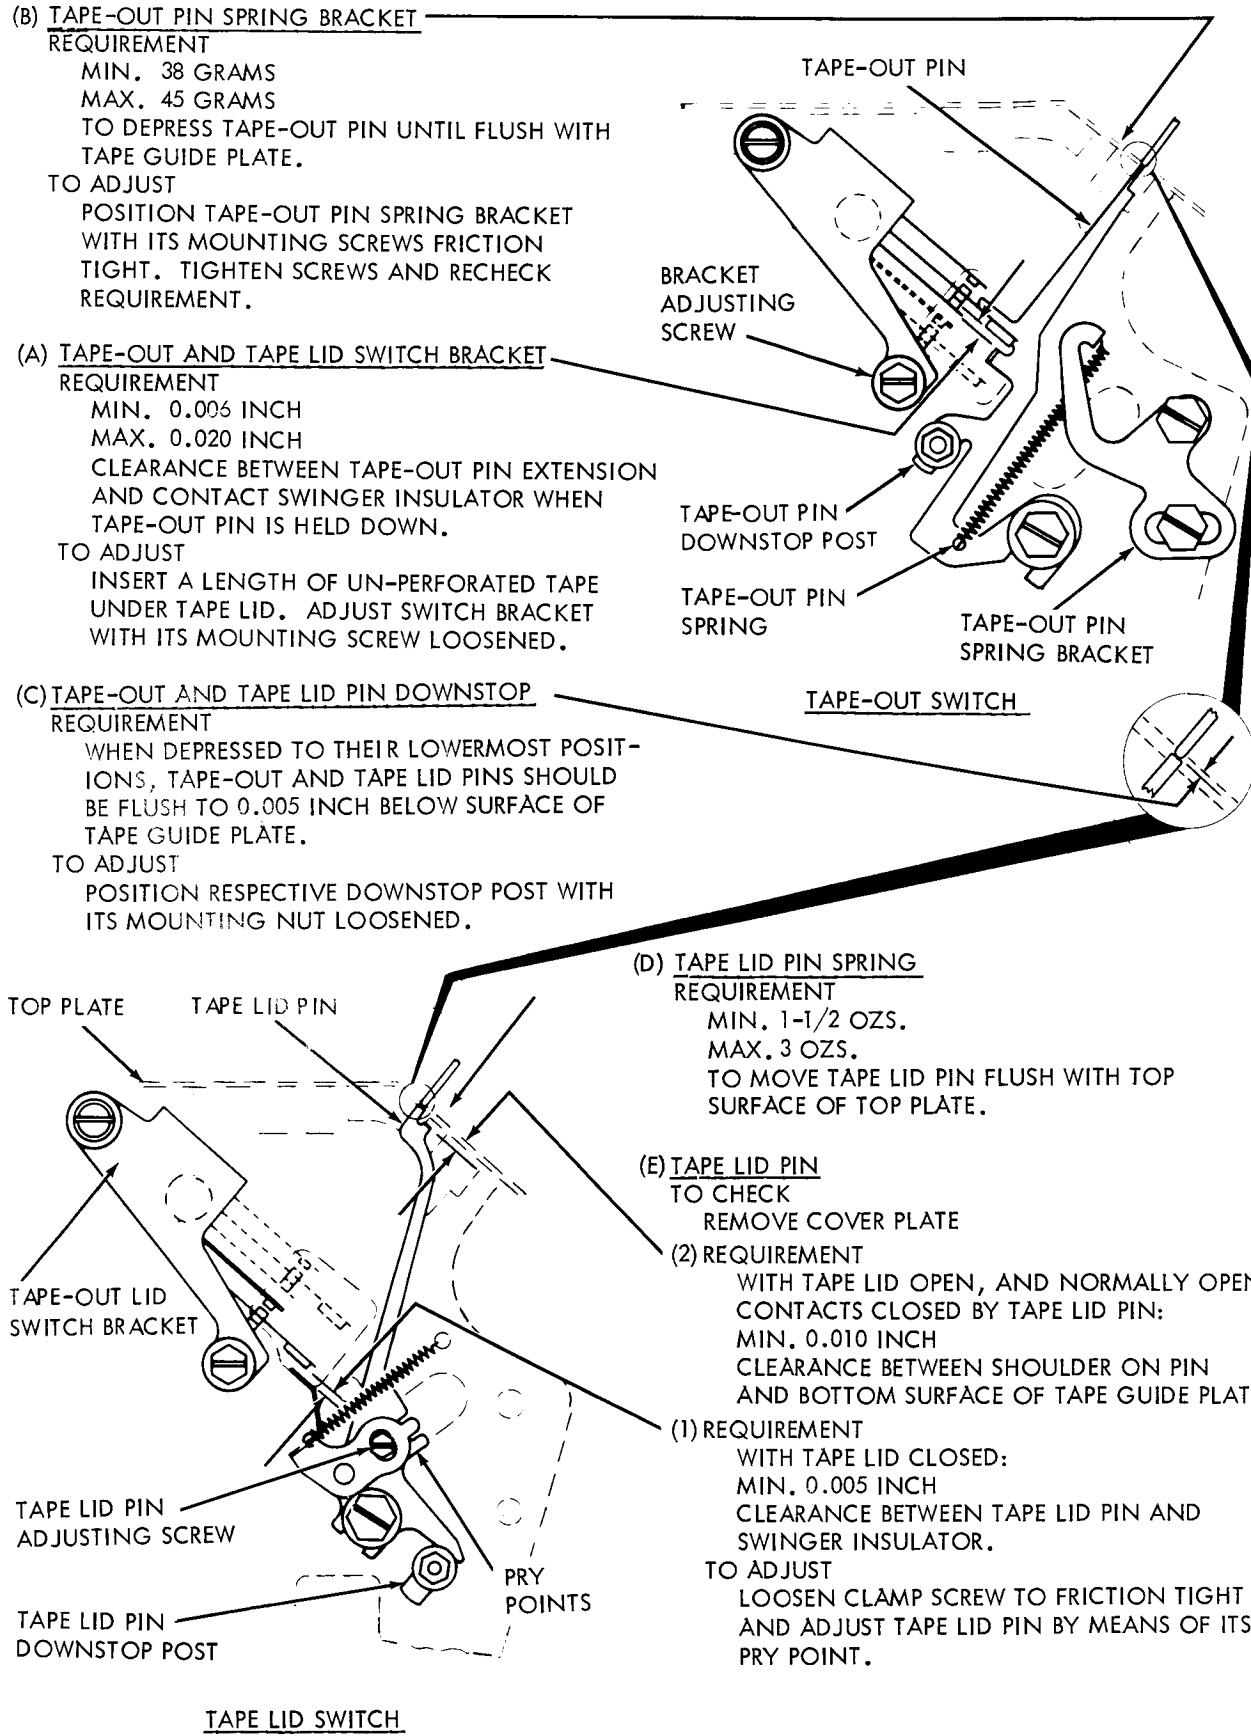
TAPE-OUT AND TAPE LID PIN MECHANISM
